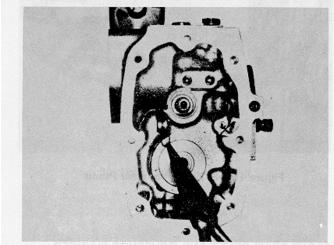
G-10. Remove Snap Ring from Throttle Shaft
